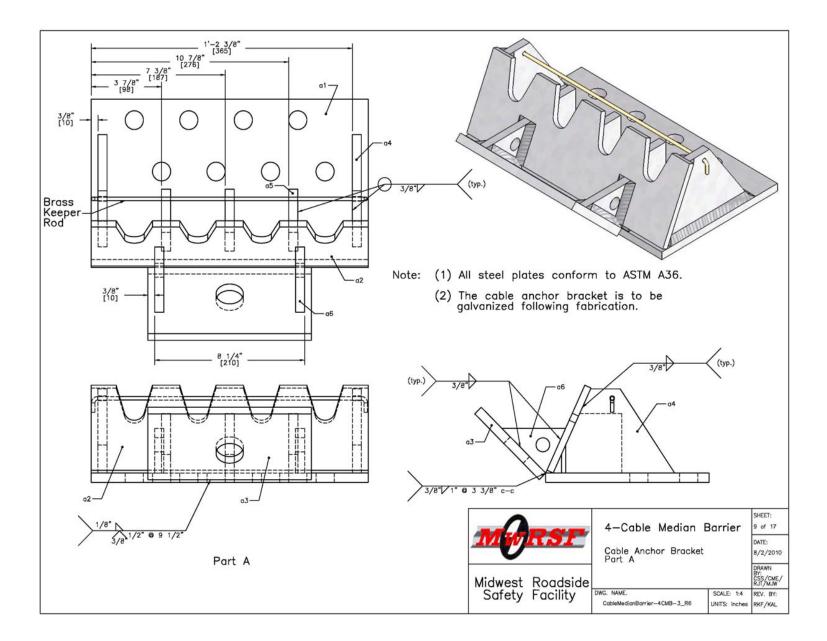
Cable Anchor Bracket, Test No. 4CMB-3
